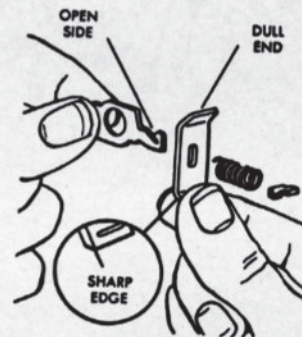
If Fairbanks-Morse starter friction shoe assembly is disassembled, be sure to reassemble as shown.
